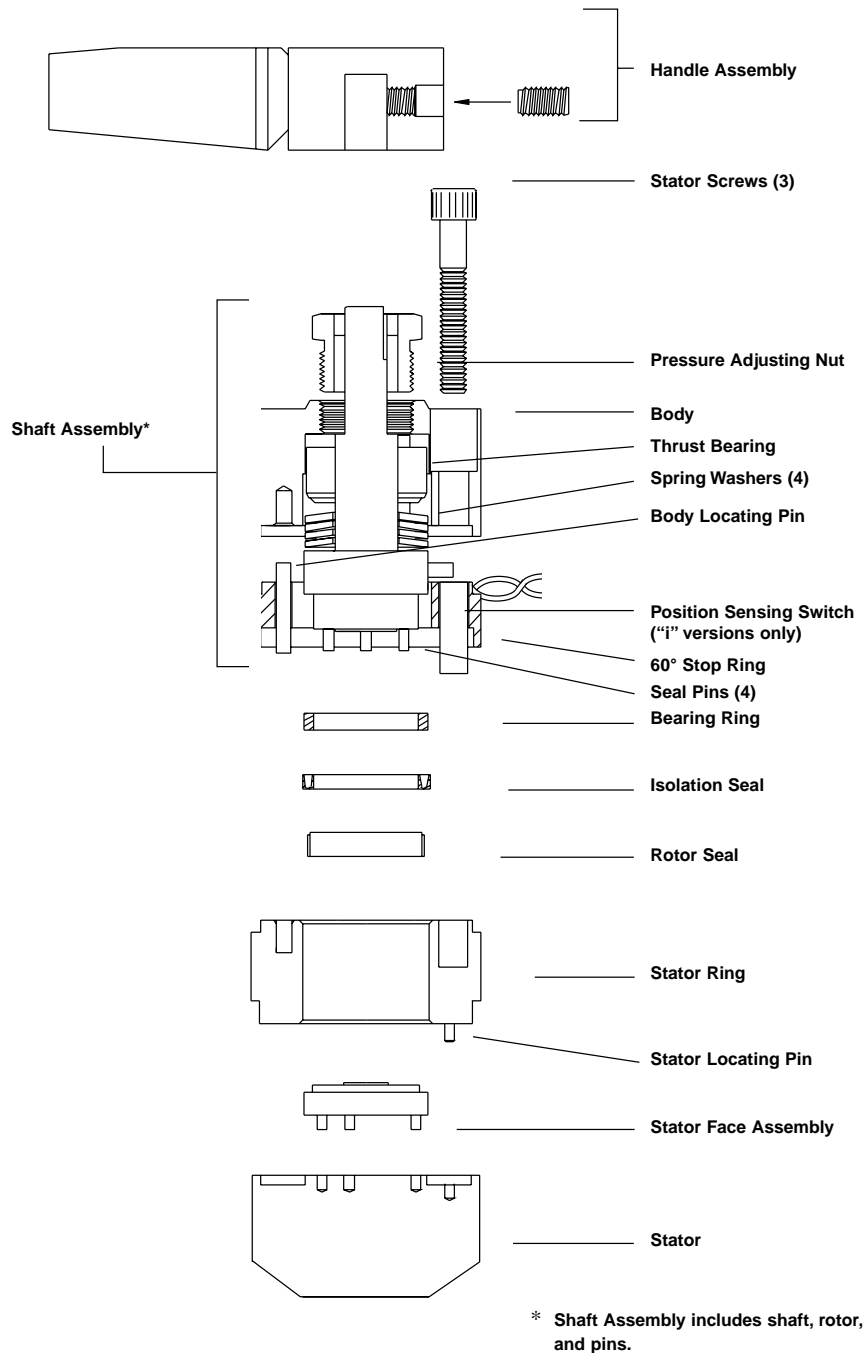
Exploded view of 3710(i) and 3710(i)-038.
